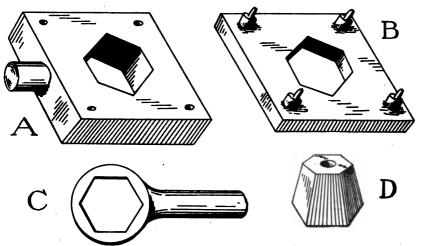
Parts of tool used in cutting out crosshead pin nuts and crank pin nuts. C.—punching a hole in a closed hexagonal wrench.
